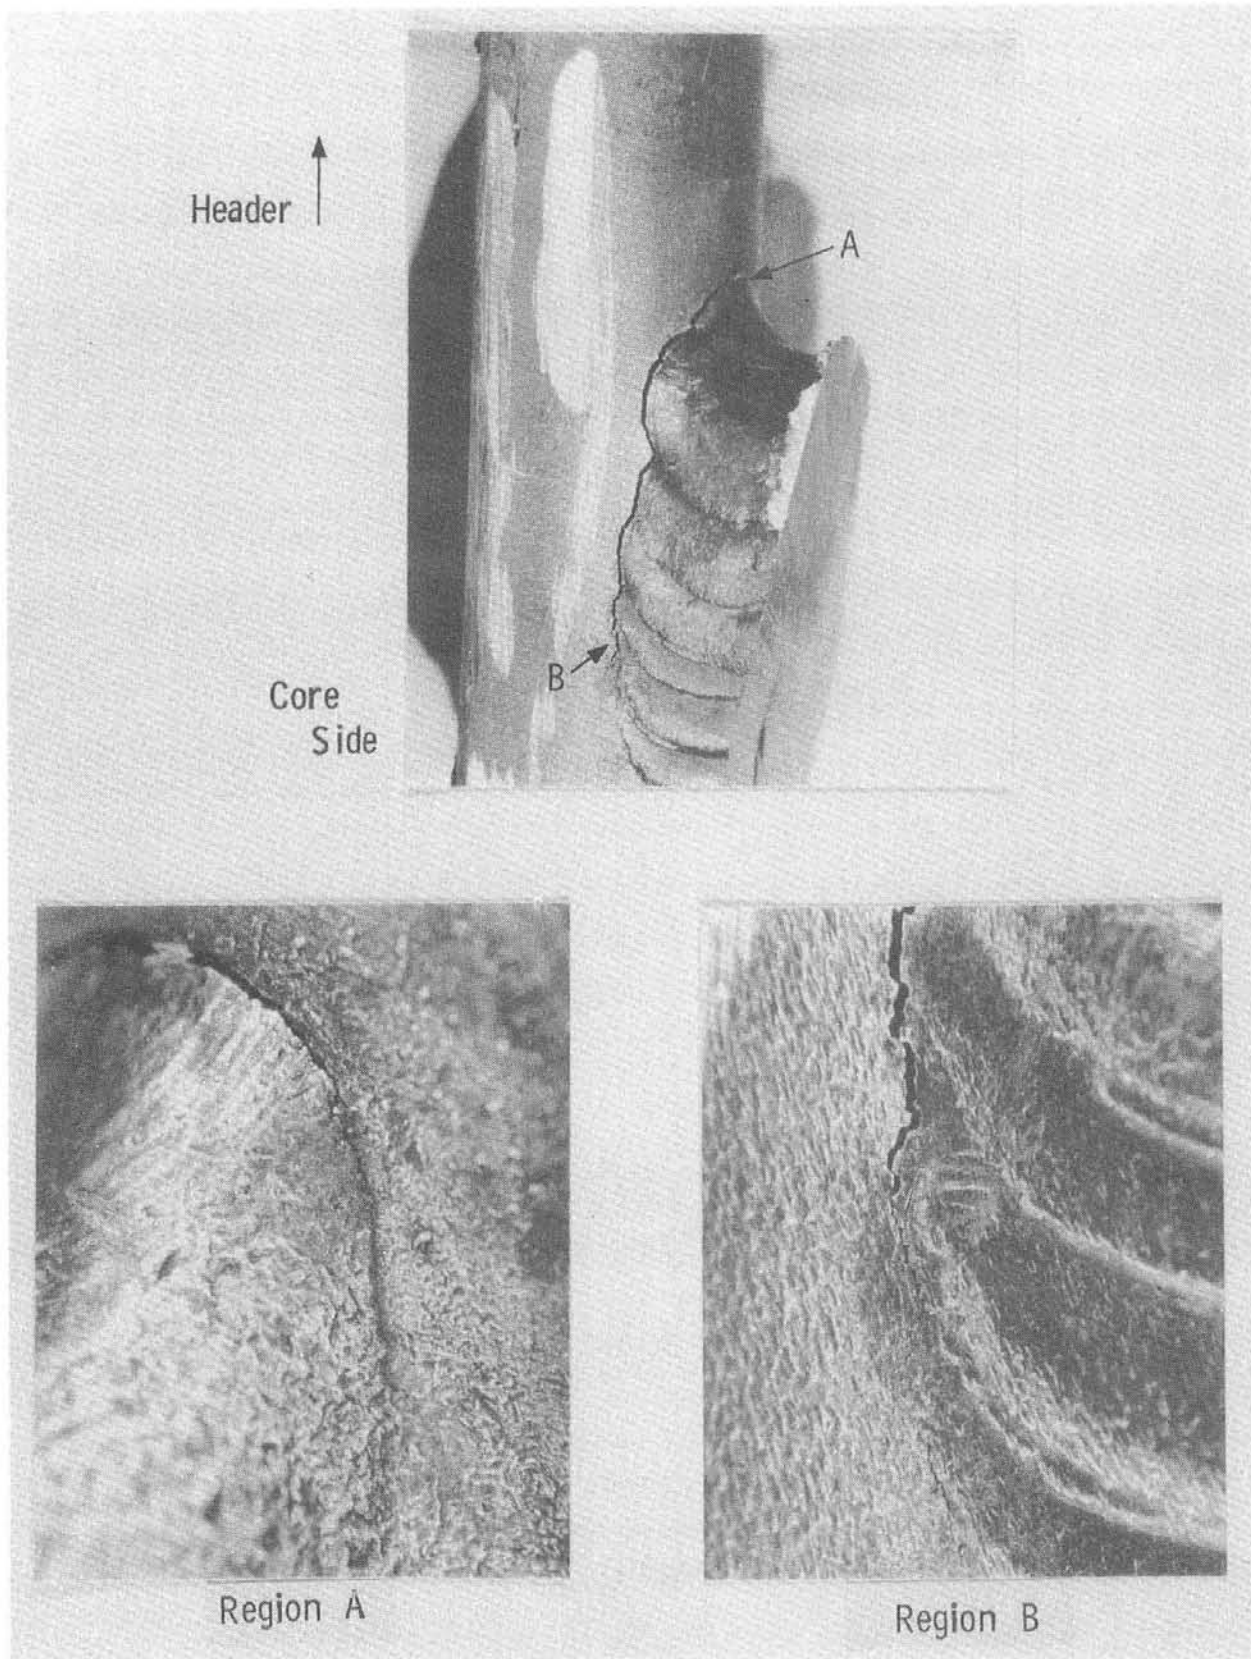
Photograph of the section of tube and weld removed from the panel with the interstice weld leak. Regions A and B show the termination of the crack next to the interstice weld.
